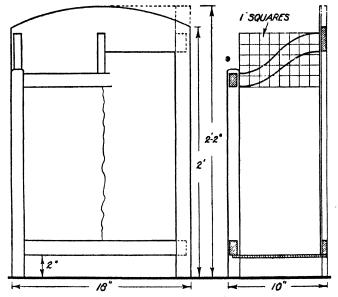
FRONT ELEVATION AND SIDE SECTION.
